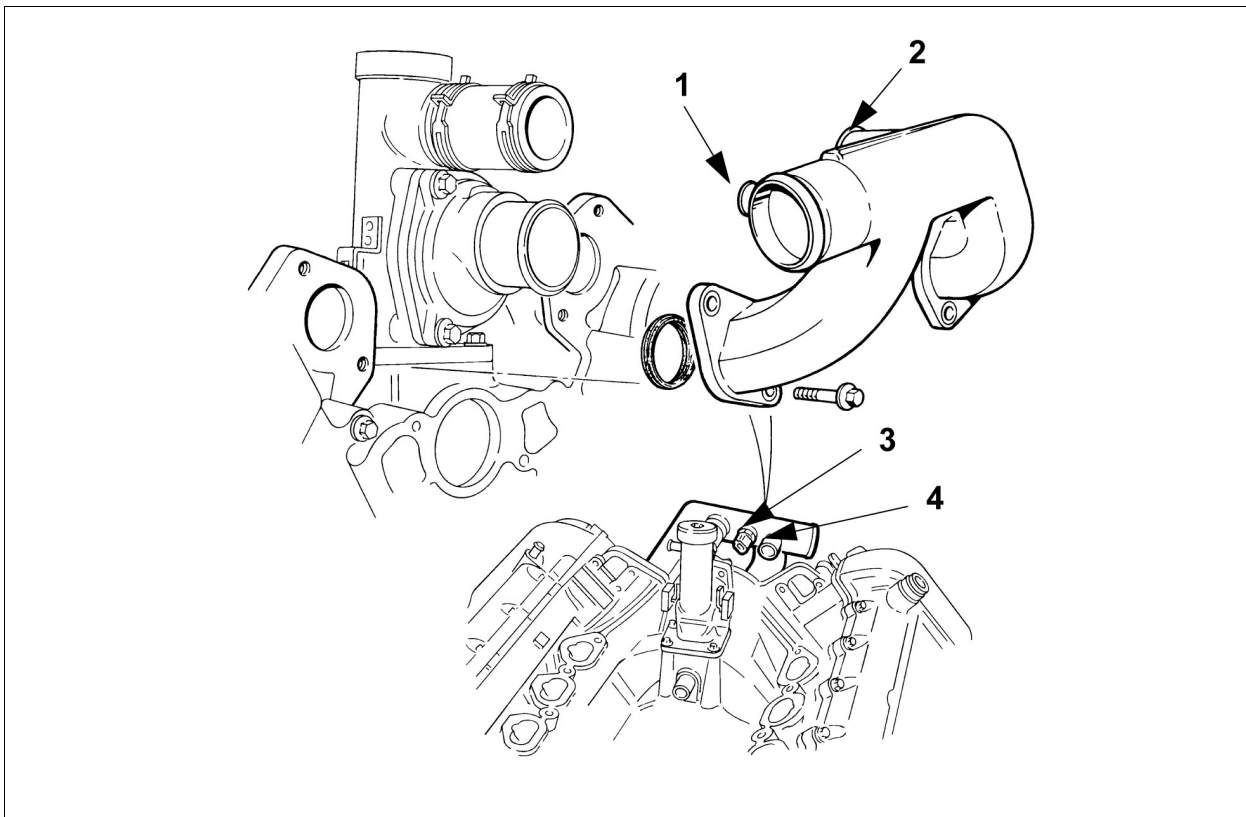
COOLANT OUTLET DUCT — N/A Only
